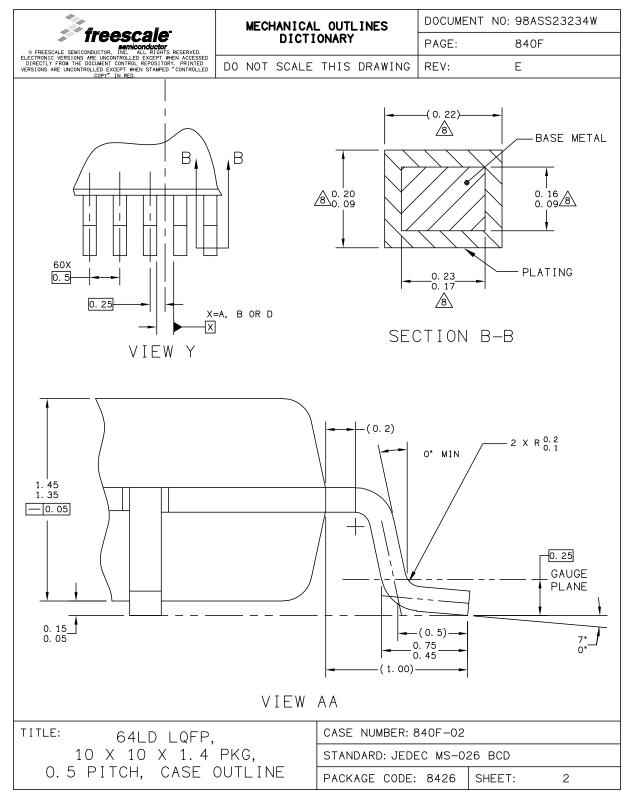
64 LQFP mechanical drawing (part 2 of 3)
